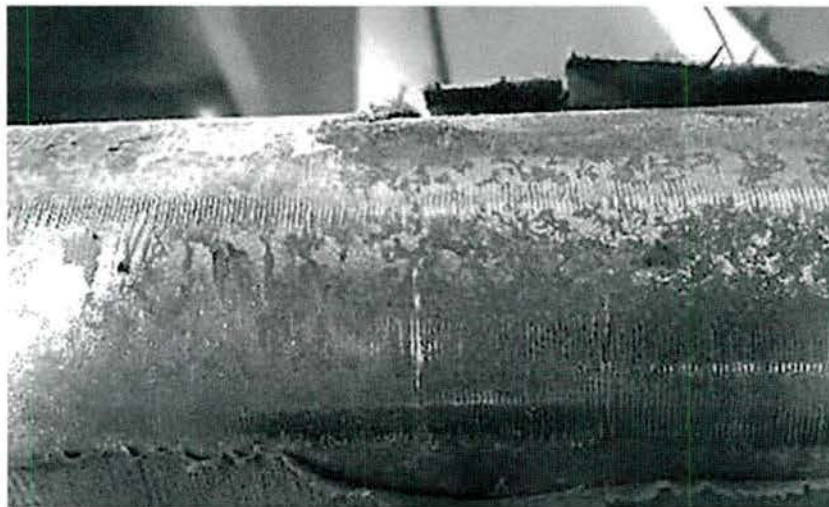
Surface of Torsion Bar after Single Point Turning for coating Removal
